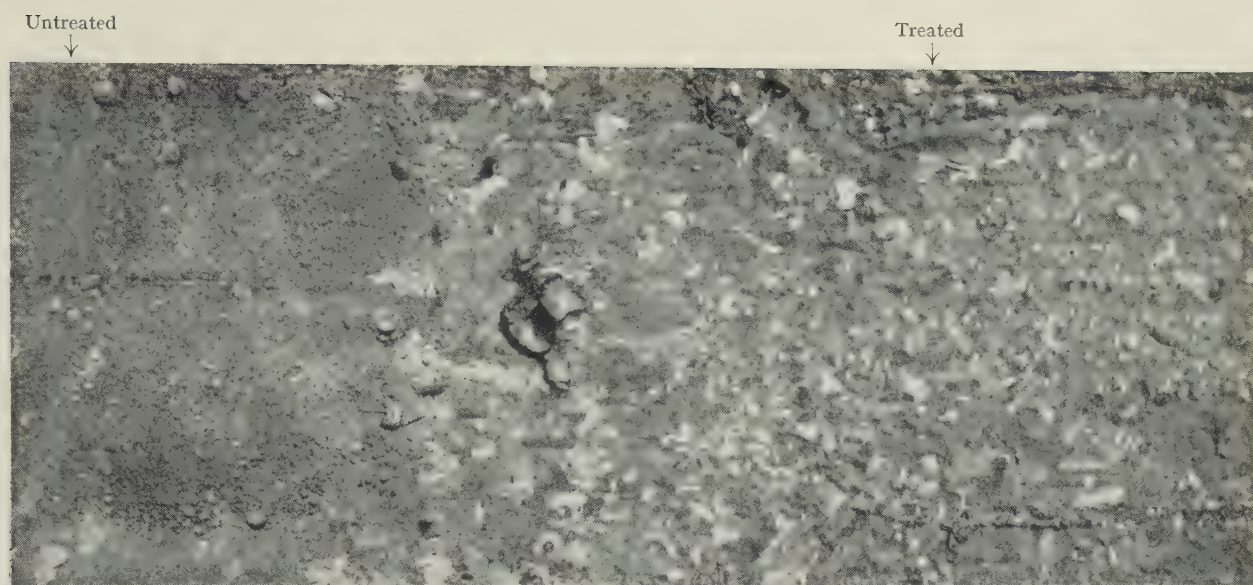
Lead Cast in Steel Mould Half Coated with Lead Powder.
